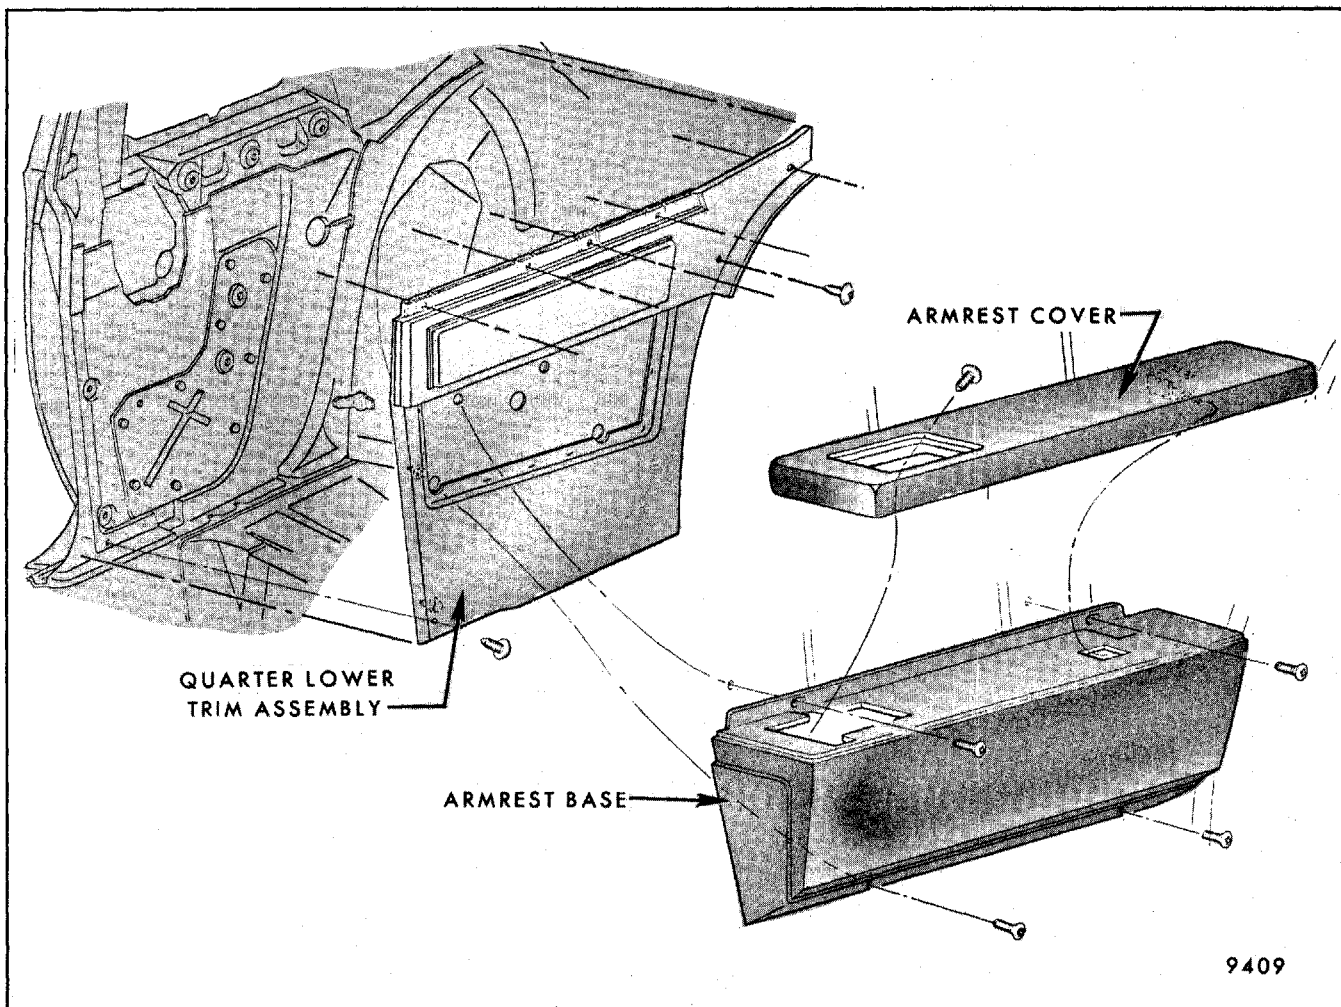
Quarter Armrest Attachment - "B" Styles (less 4BZ37)
